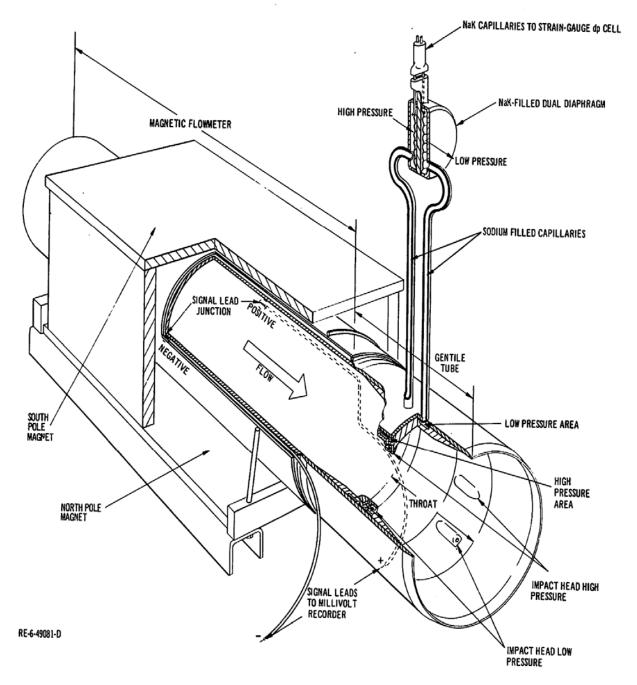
Figure 6.11-1 Magnetic Flowmeter and Flow Tube for Large Sodium Coolant Piping [Vol. II, Chapter 6, p.6.11-3]
